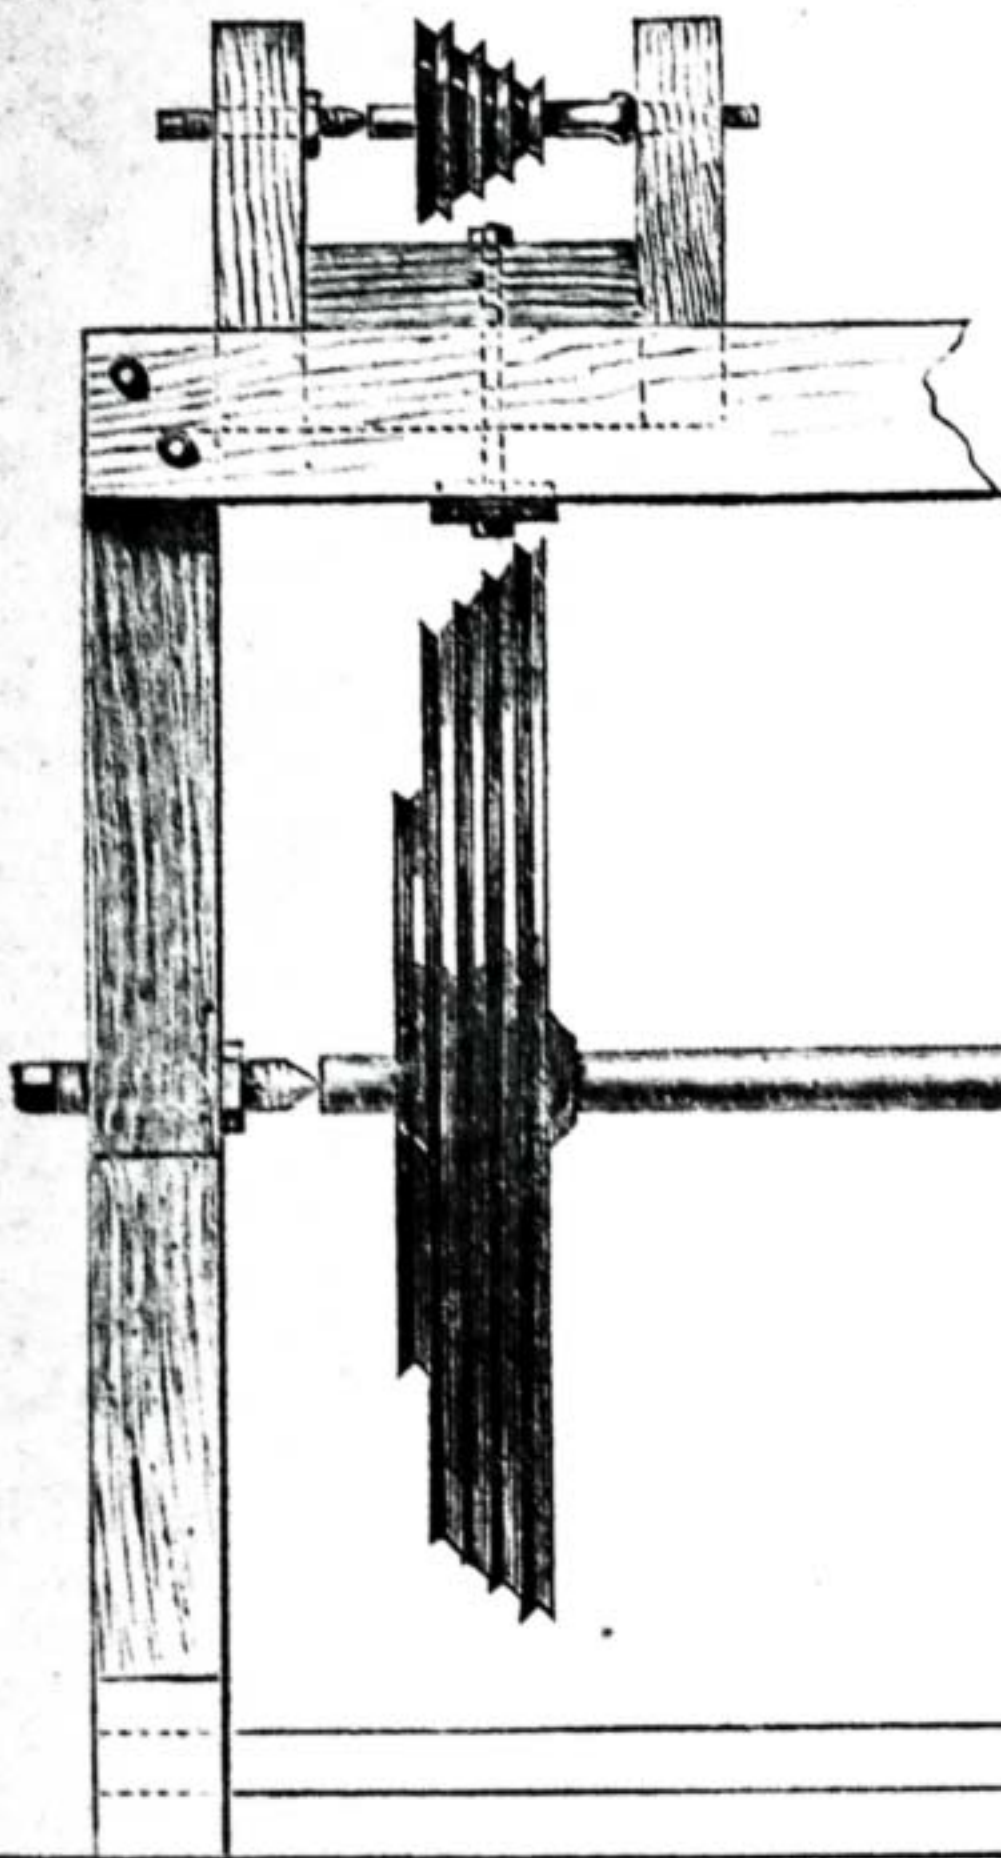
Front View of Lathe. Fig. 4.—End View of Lathe—P, Pulley; H, Headstock; B, Bed; L, Leg; W, Flywheel; S, Stretcher. (Scale, 1 in. to 1 ft.)
